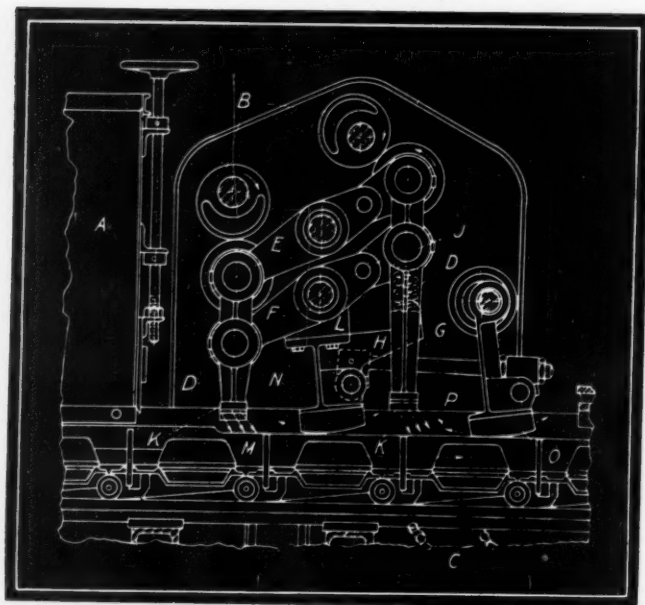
Tampers actuated by cams follow movement of conveyor to compress ceramic material
